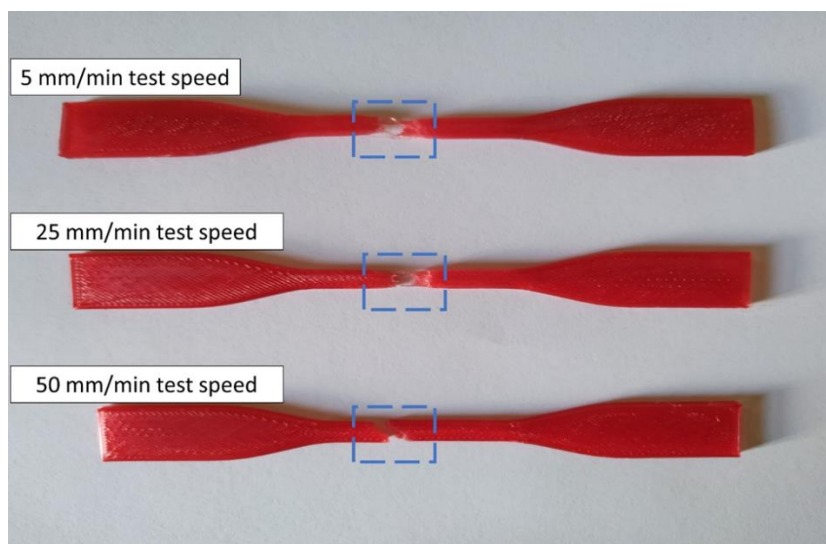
Macroscopic views of the deformed PETG samples having 0.2 mm layer thickness
